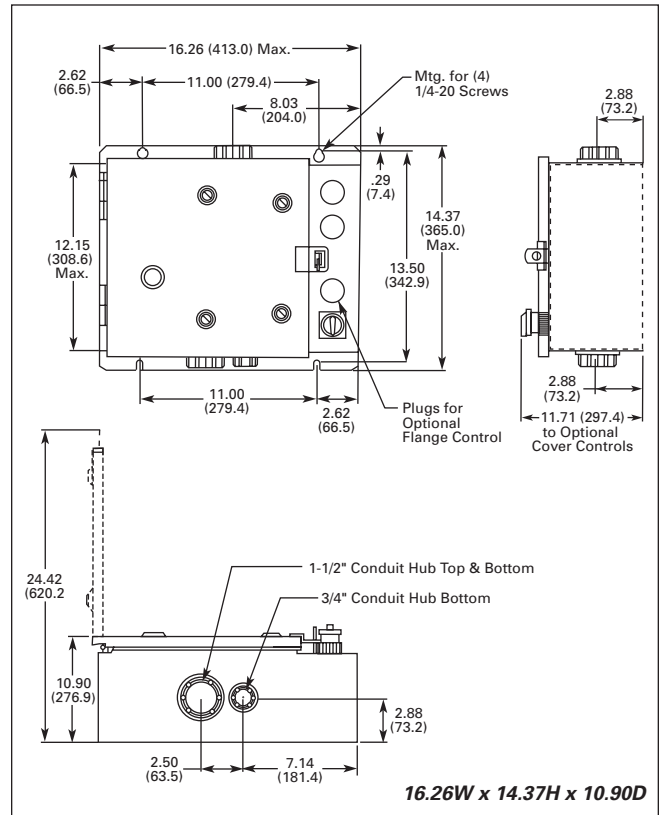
Box 7A, Type 4X — Approximate Dimensions in Inches (mm)
